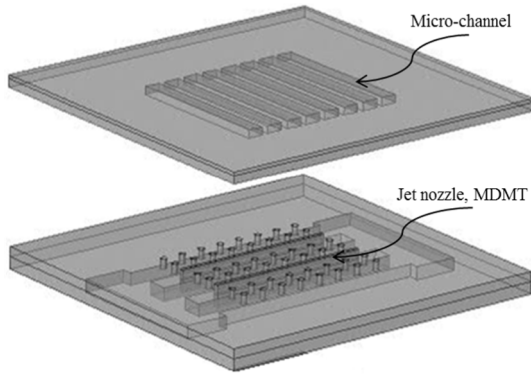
Exploded view of the proposed silicon microcooler (the material is set to be transparent for illustrating the internal details of the cooler).
